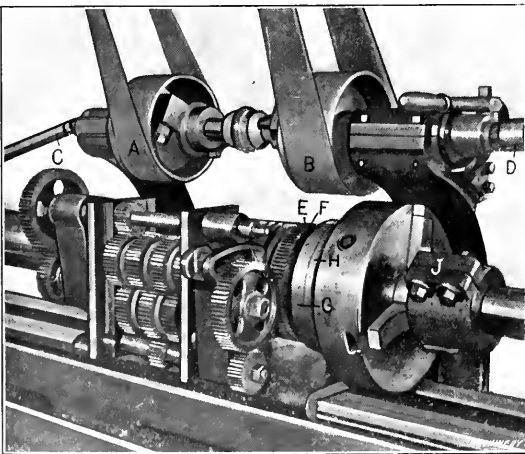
Rear View of Carriage, Chuck and Gear Box
